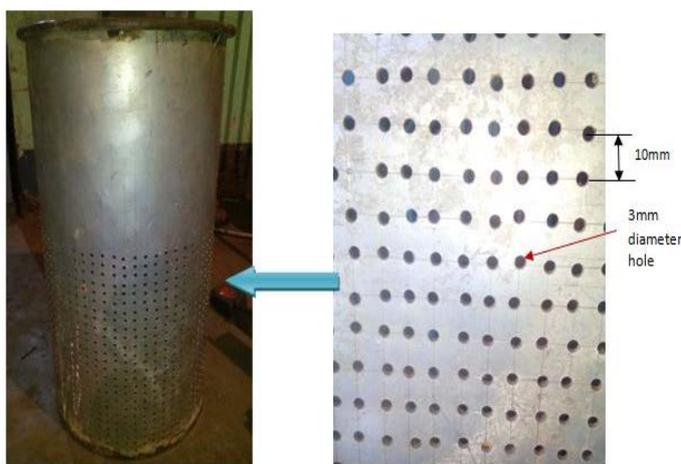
Perforated cylinder; a) complete cylinder, b) close view of the perforated part of the cylinder
